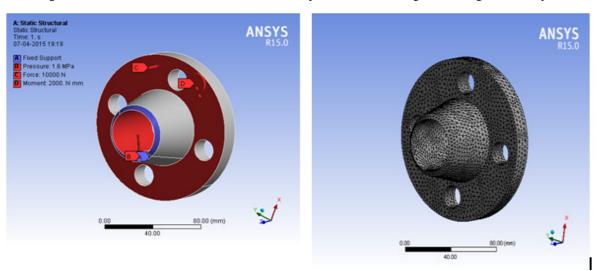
Boundary Conditions of weld neck flange and Meshed finite element model of weld neck flange
